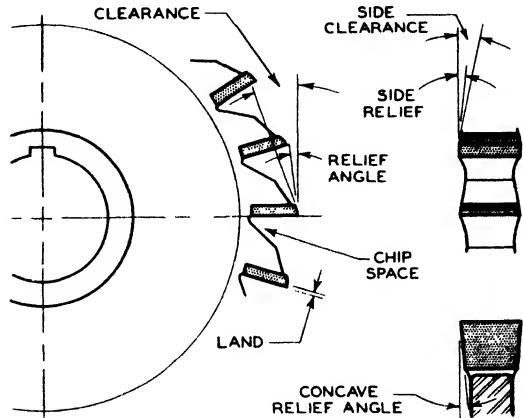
Tooth Construction and Nomenclature of the Side or Slot Milling Cutter
